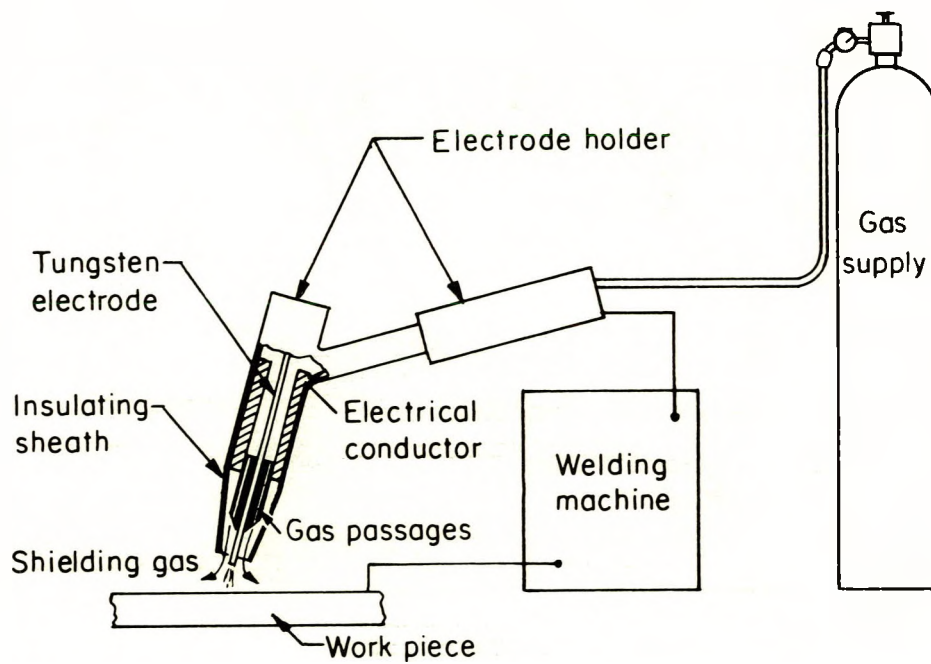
SKETCH OF A GAS TUNGSTEN-ARC WELDING SYSTEM (Ref. 26)
